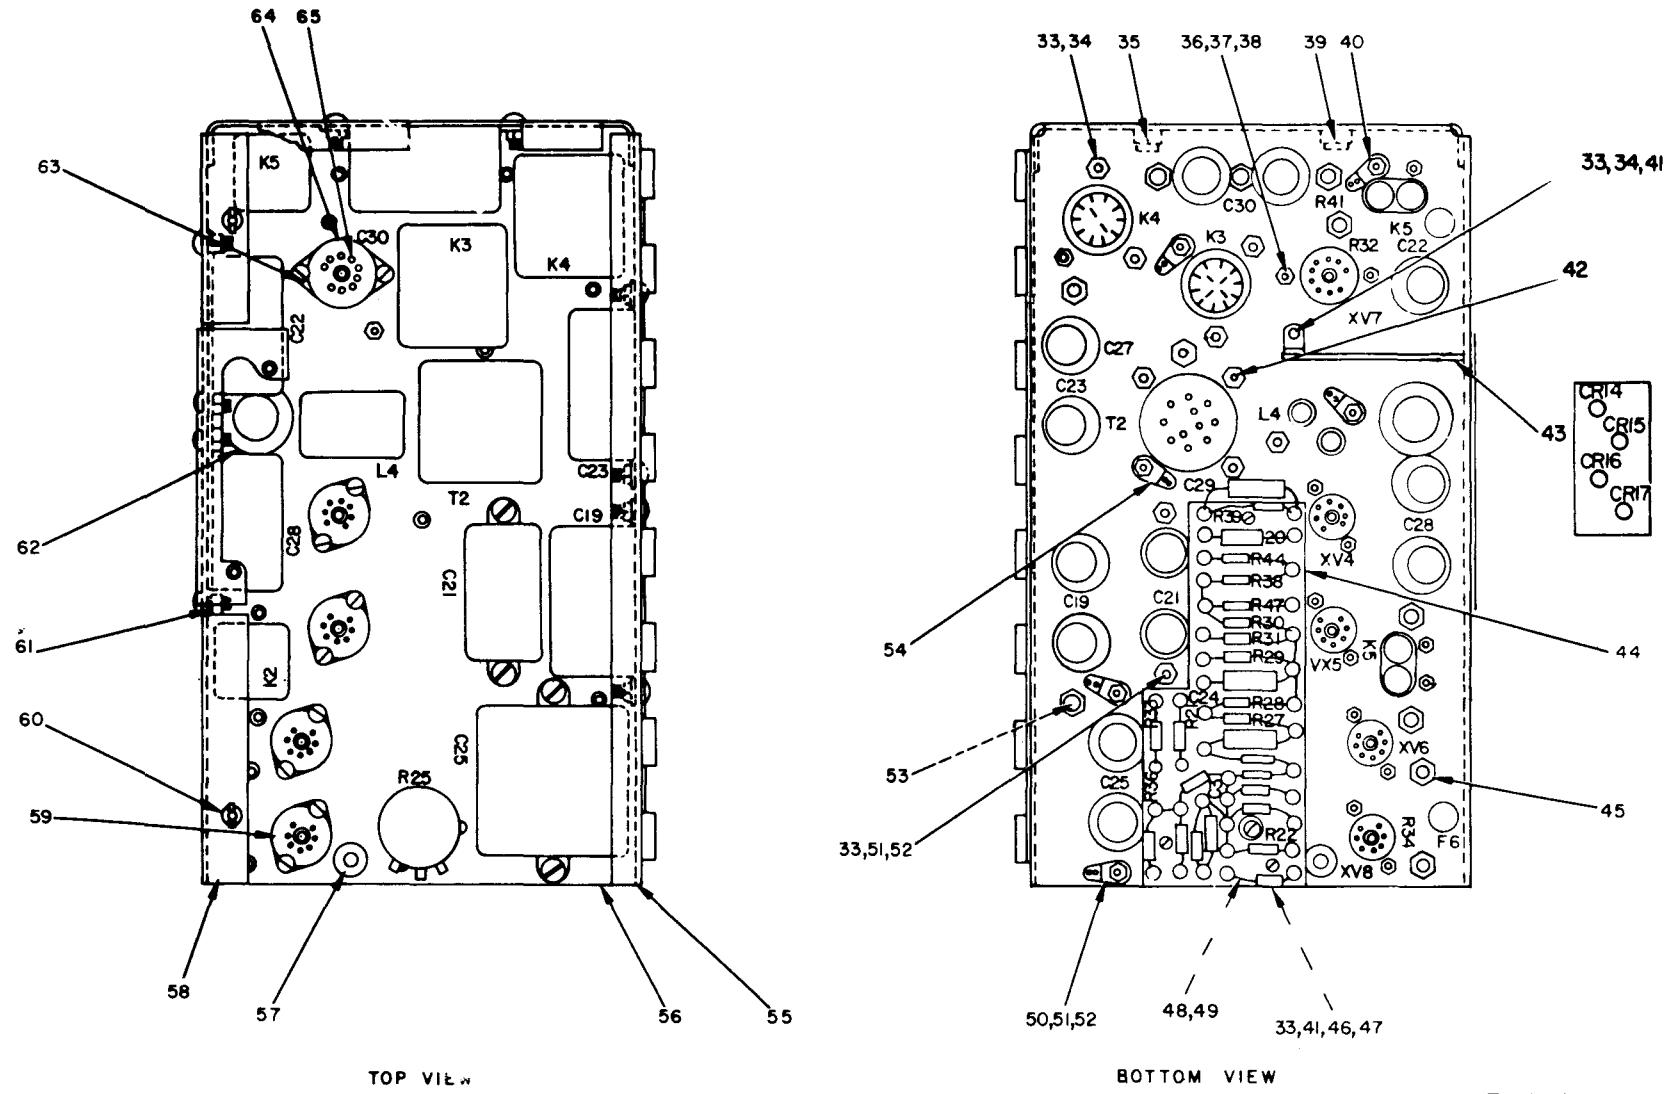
Upper Chassis Subassembly (Sheet 1 of 2).
